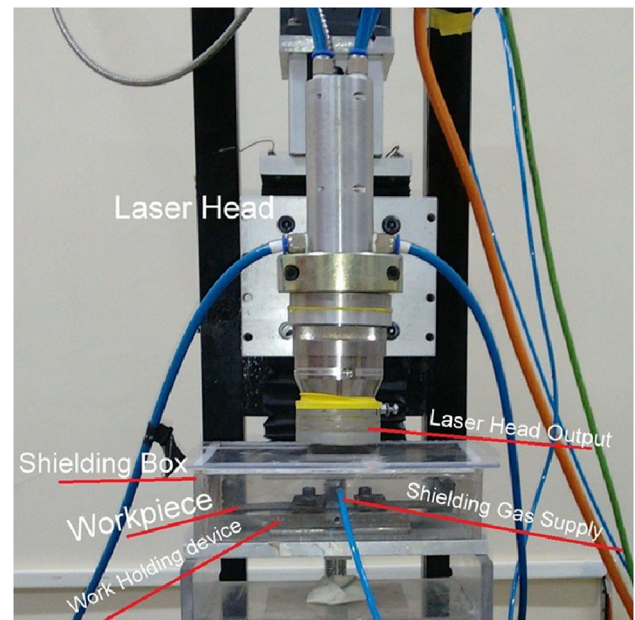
Fiber laser work station with an arrangement for welding operation
